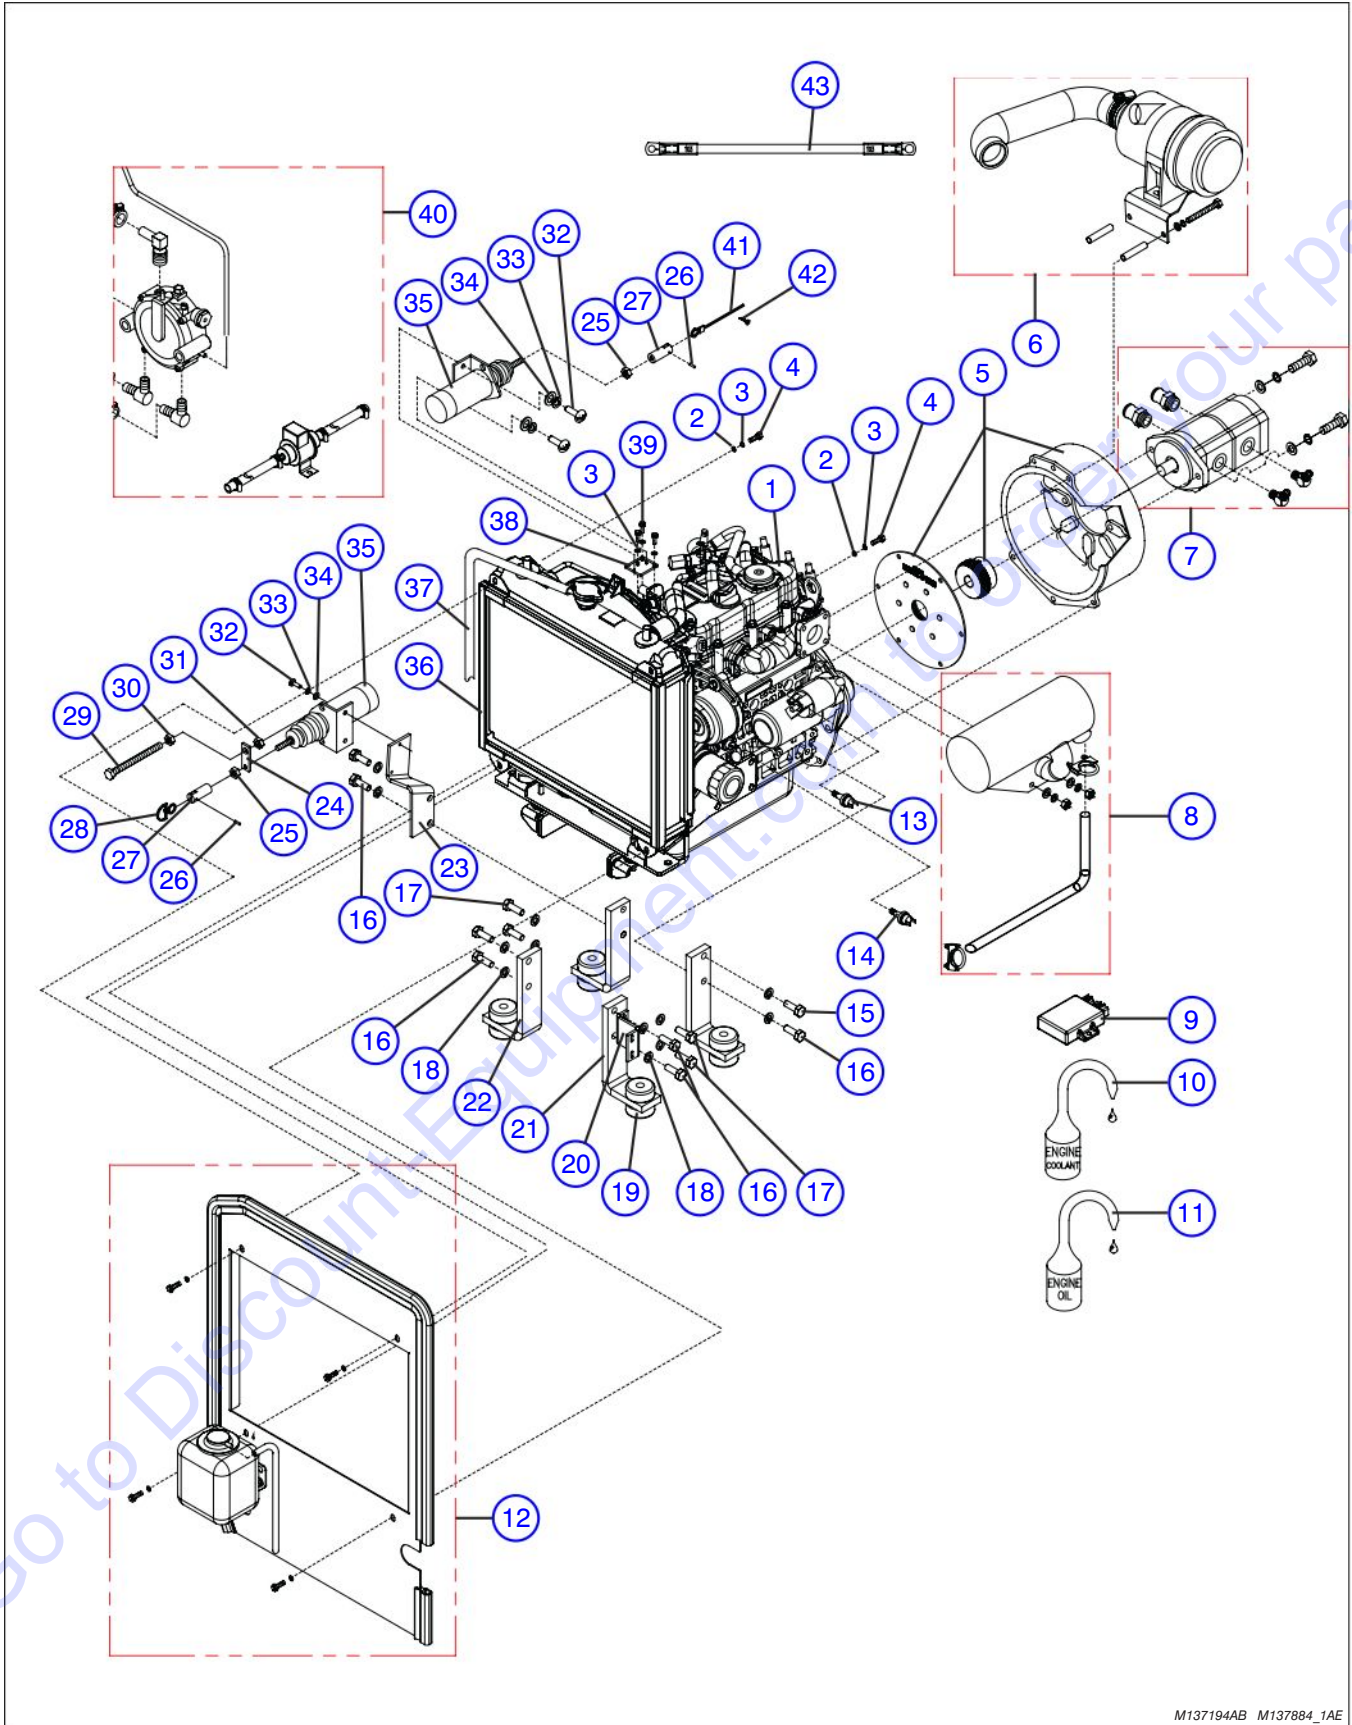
Engine Assembly (Kubota Engine DF972) (Continued)
